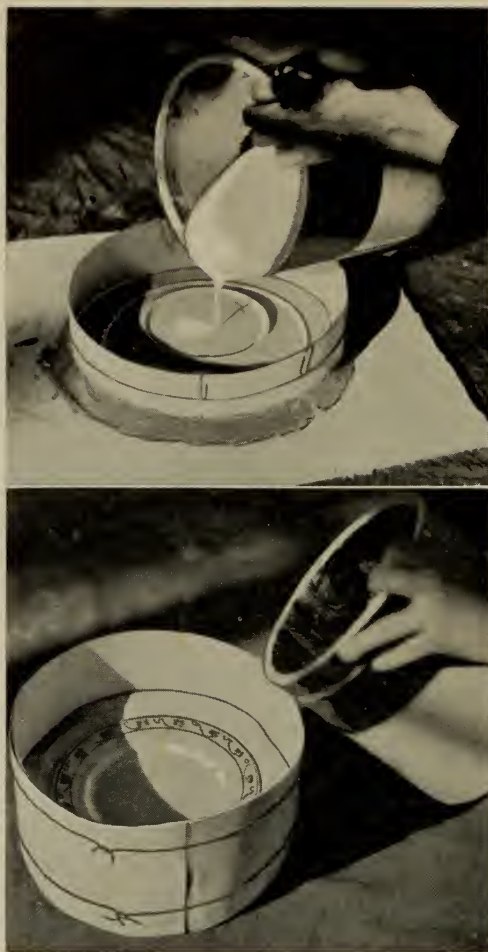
Casting the bottom and top halves of a flatware hand mold.
